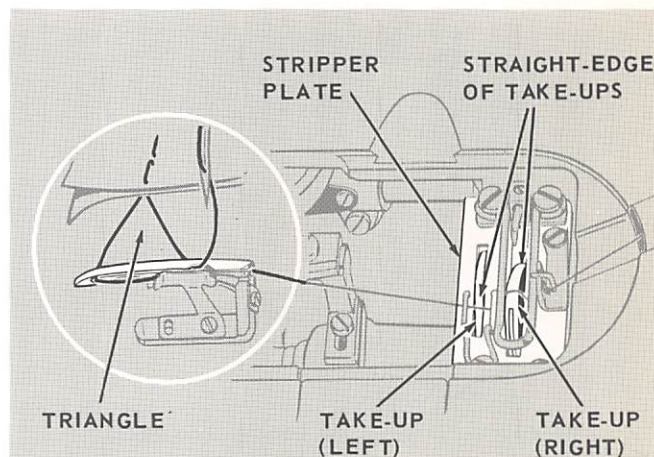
Looper-Thread Take-Ups Contacting Thread
